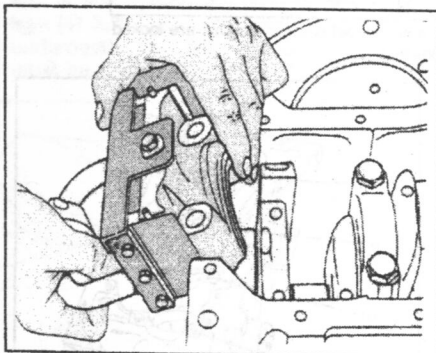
Fitting the rear main bearing cap with the special tool to fit the side seals. The two side shims must be inserted on the L.H. and R.H. sides.
